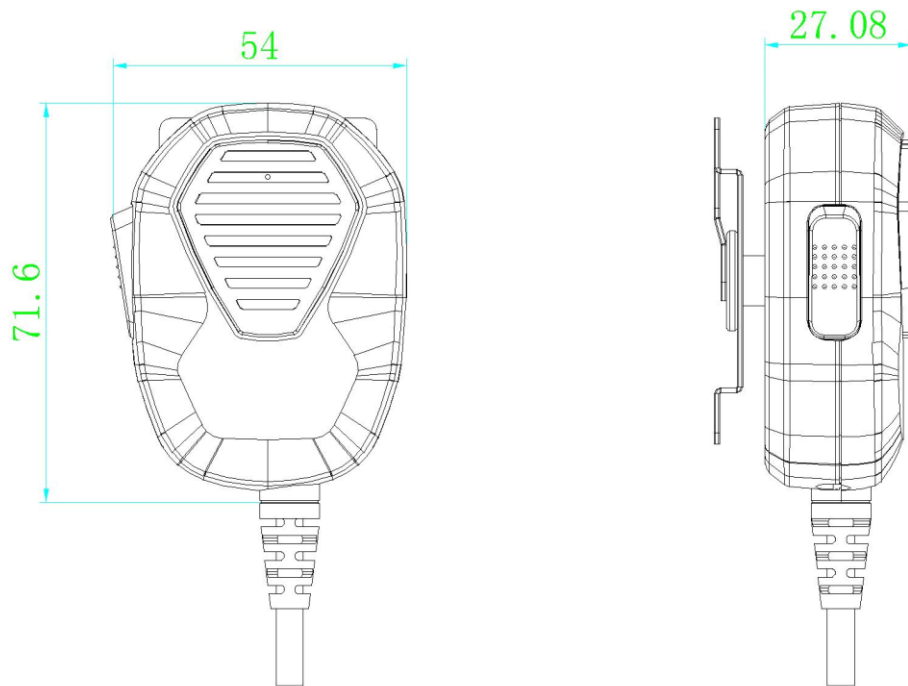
Dimension of DS-MP1351 Mobile Intercom
